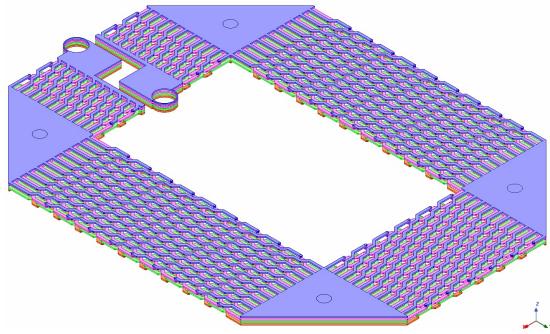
3D view of a four layer, 40 strand litz PCB design.
